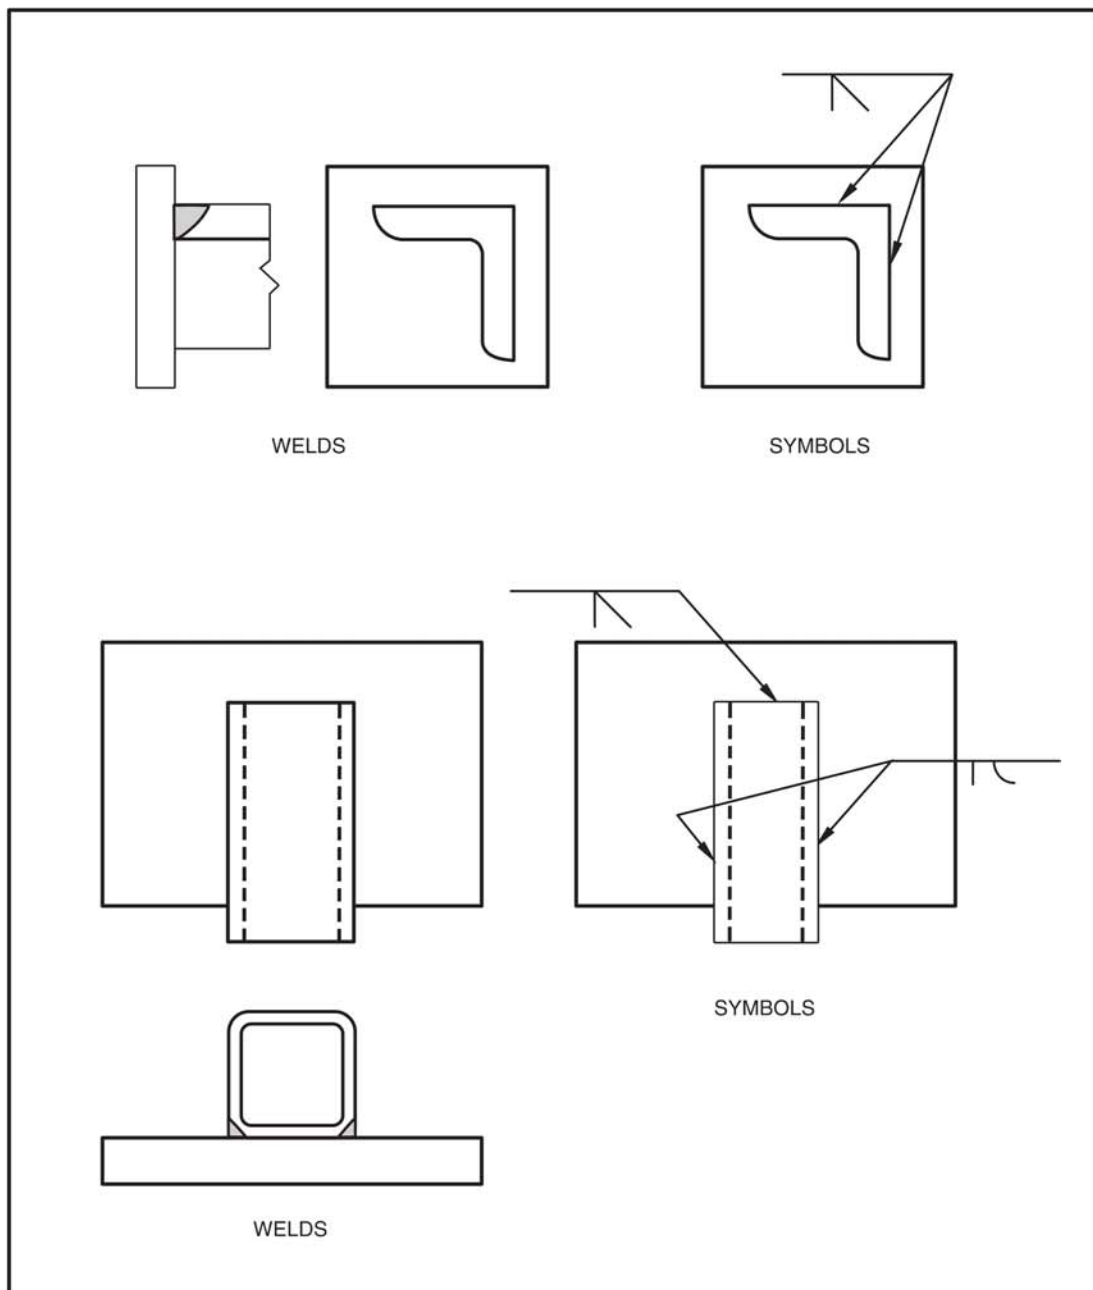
Application of the Extent of Welding of Groove Welds
